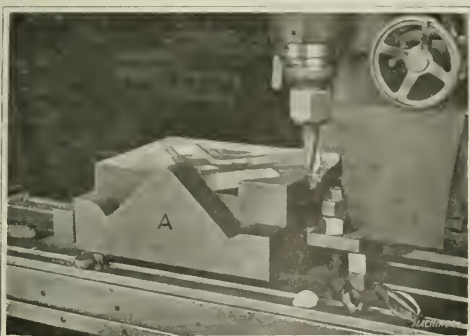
Machining Impression in Locomotive Switch Crank Die
